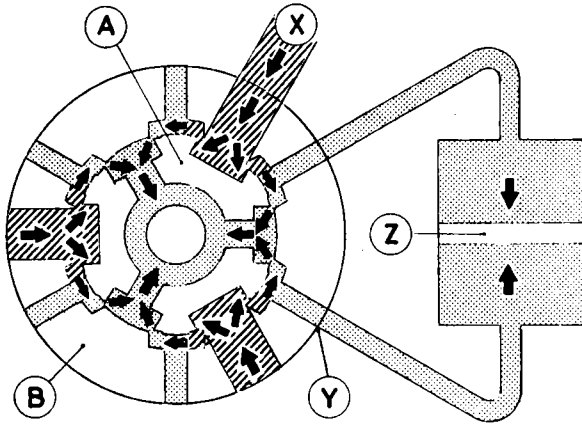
Operating diagram of the rotor valve (straight ahead)
